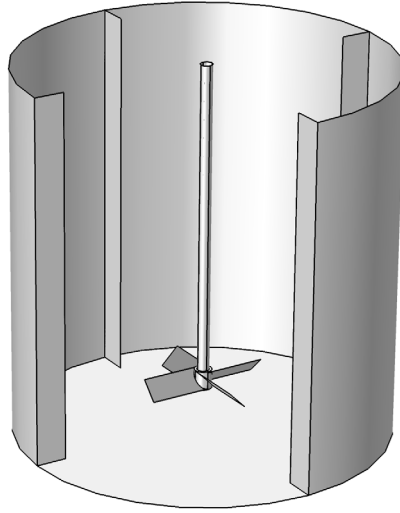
Mixer geometry showing the vessel, baffles, and impeller.
